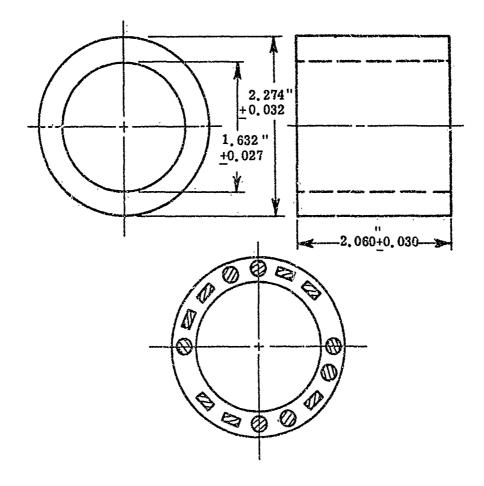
Configuration of Specimen Blanks 6Al4 as Received from Coors and Cutting Plan for Removing Phase I Macro Tensile and Macro Flexural Specimens from Blanks 6Al4-104 and 6Al4-106
